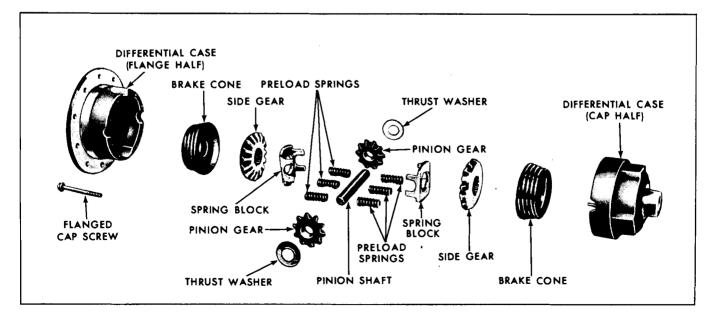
B-2 Exploded View of Two Pinion Safe-T-Track - A and G Series - "P" Axle
